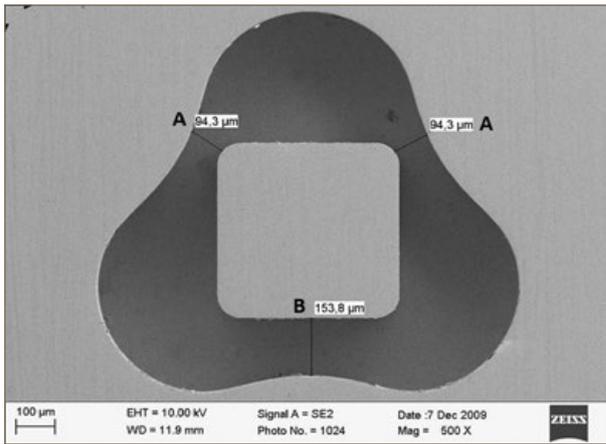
Investigated micro cavity mould of tool test insert produced by the LIGA-process. The relevant dimension are A (94.3 µm) and B (153.8 µm)
